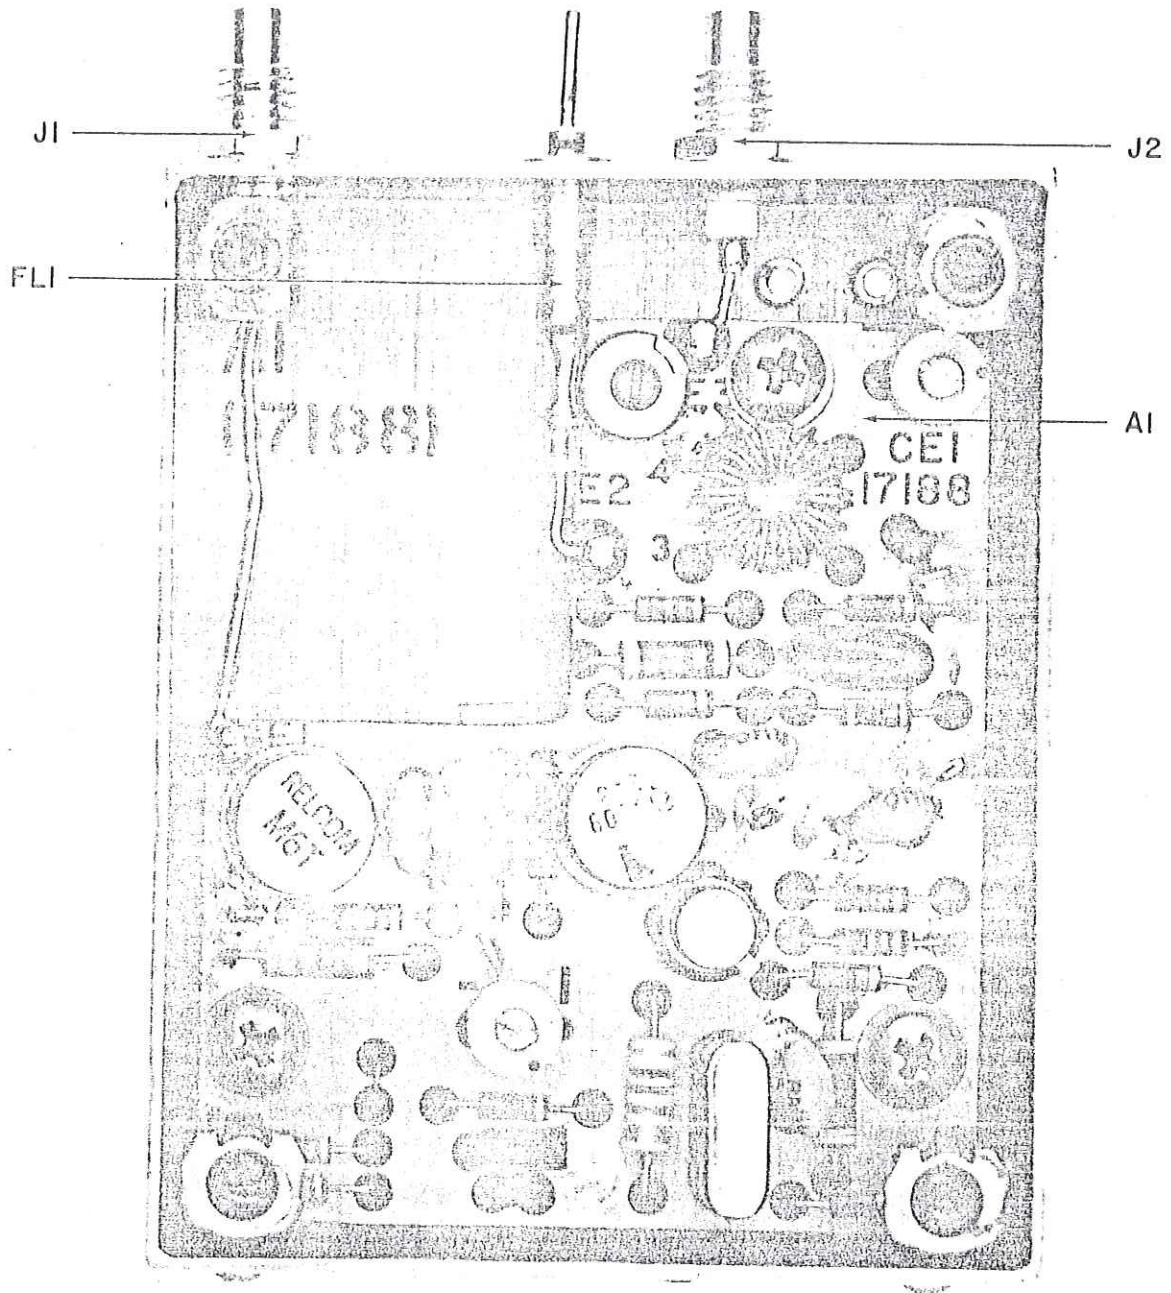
Type 791169 160/21.4 MHz Converter Assembly (A5),
